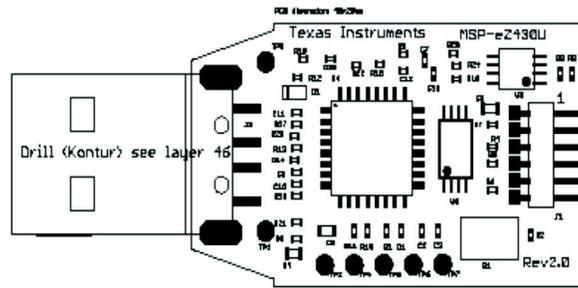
eZ430-RF USB Debugging Interface, PCB Components Layout
